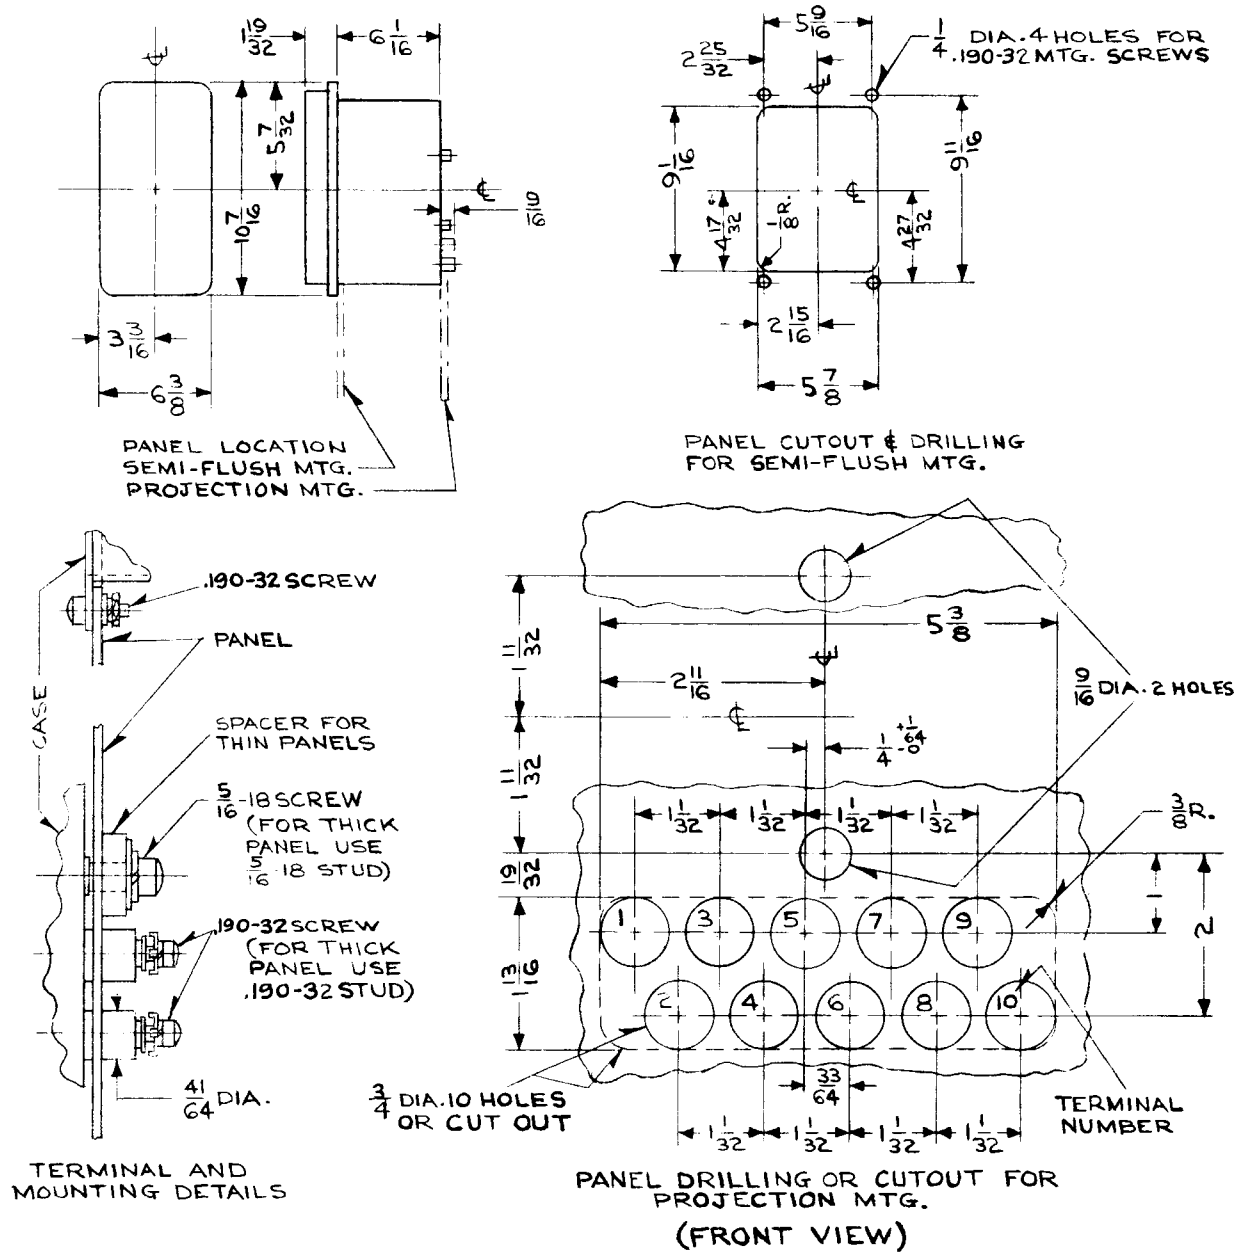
Outline & Drilling Plan for the Type PM-4 Auxiliary Unit in the Semi-Flush Molded Case.
